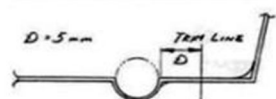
Tata tool design standard for selection of bead and standard use of bead
